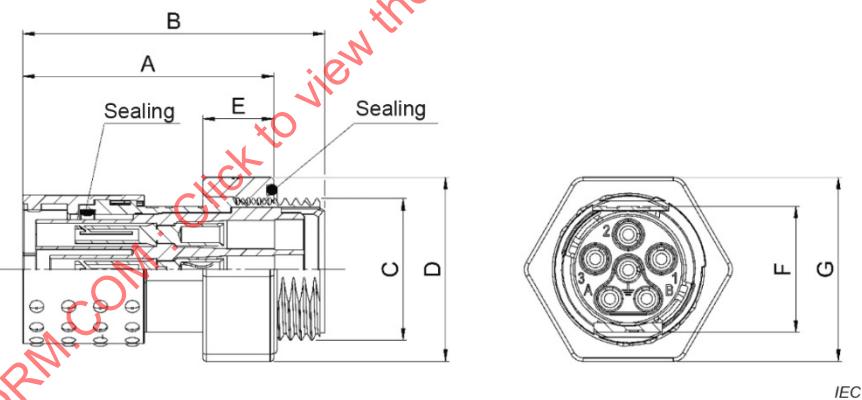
Fixed connector, female contacts, single hole mounting, circular mounting orientation
